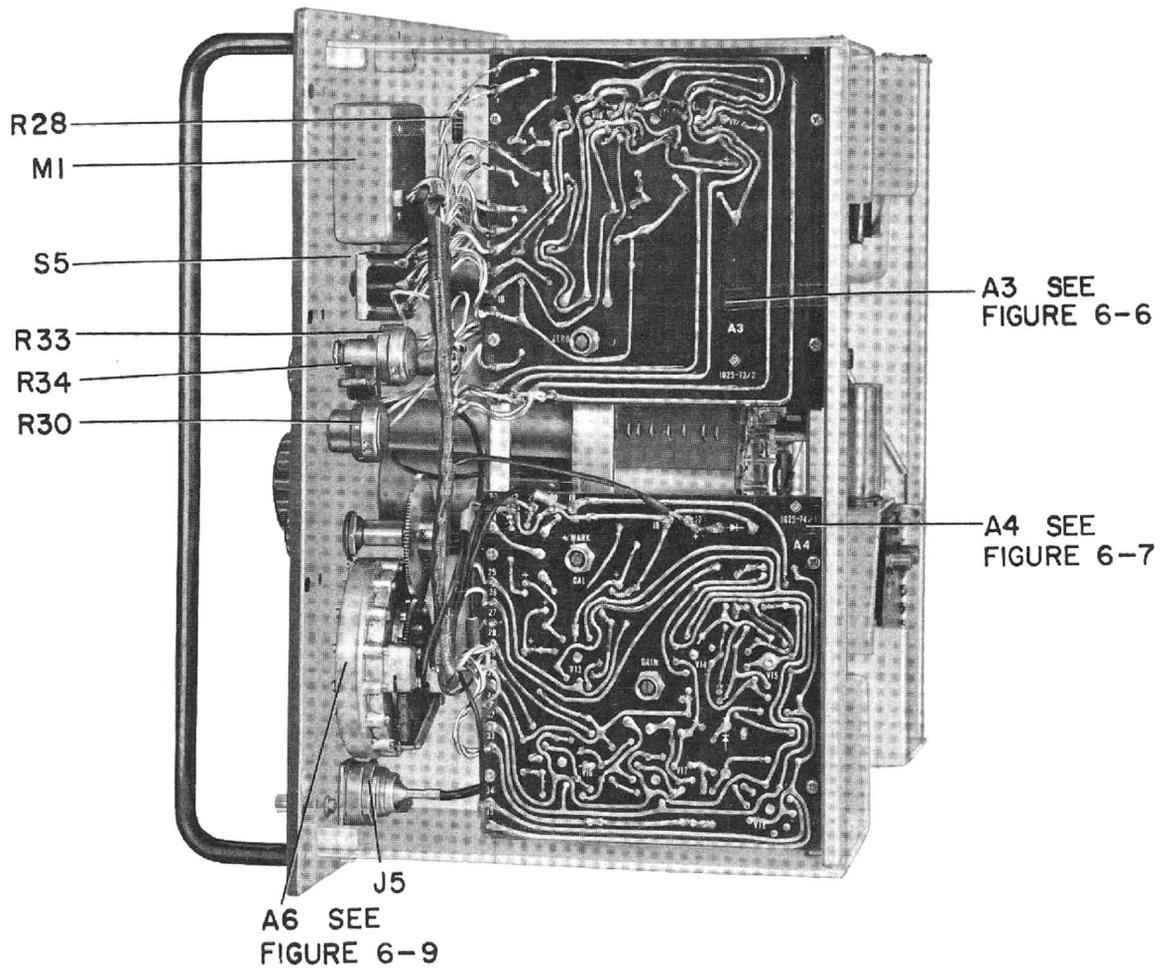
Interior view of right-hand side of the Type 1025-A.
